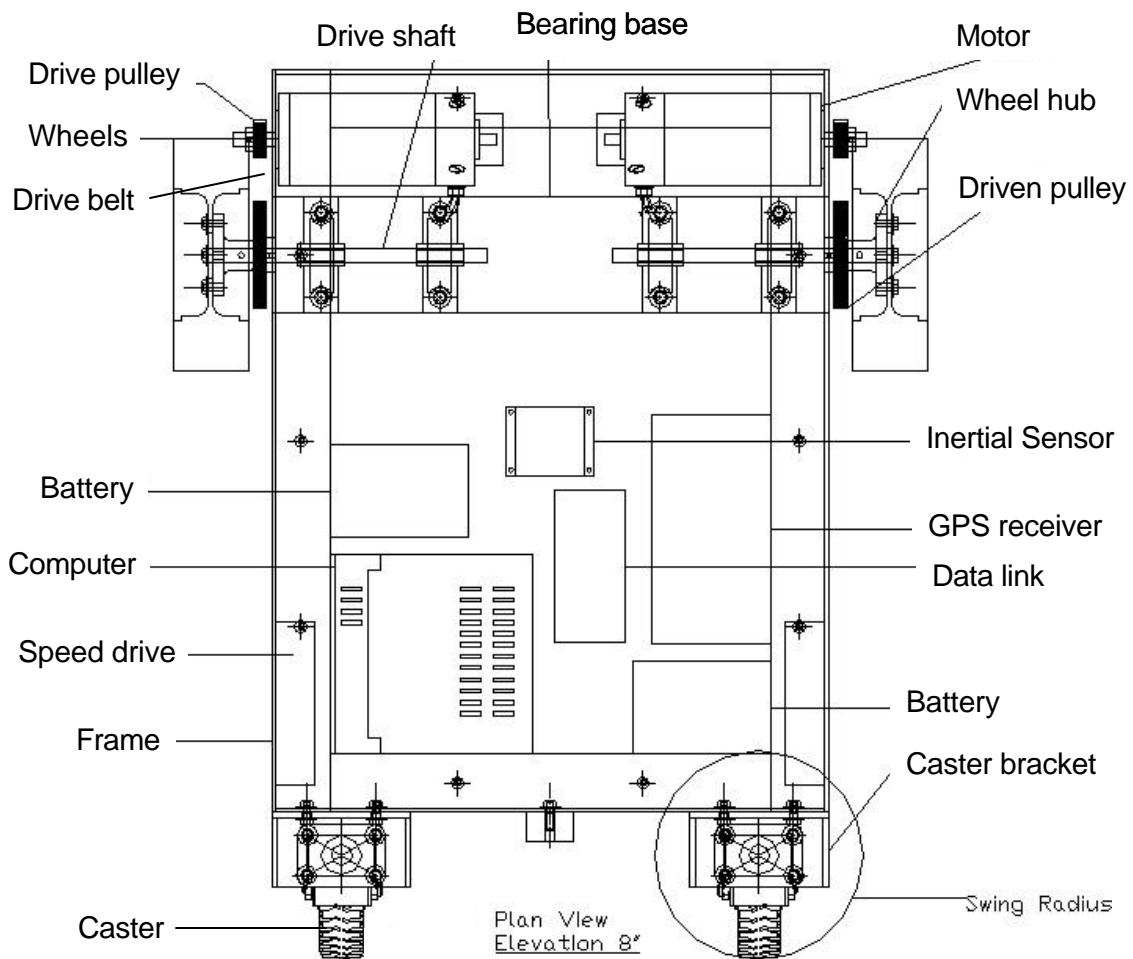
Leonard Assembly, Top View (Drawing Courtesy of John Christ)
